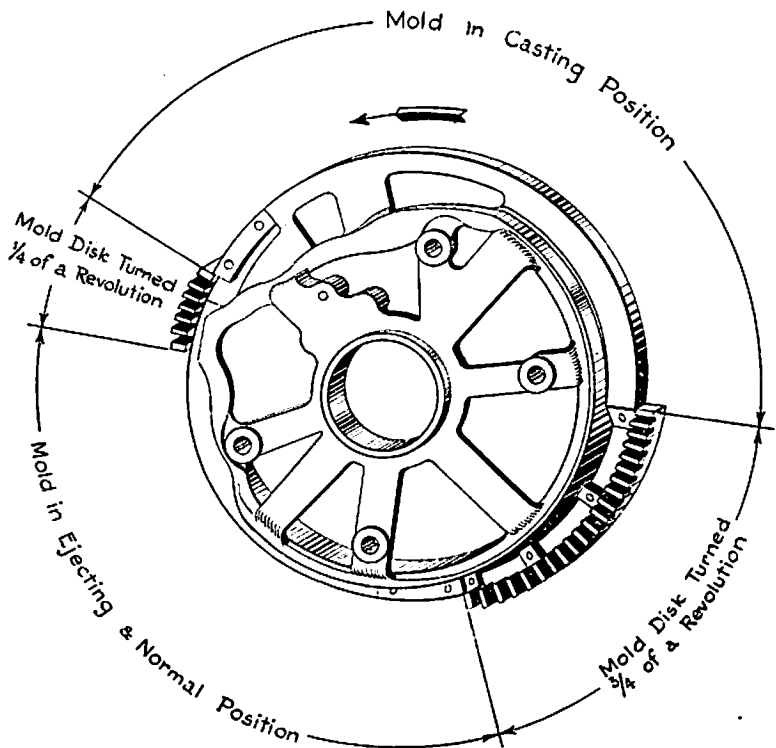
The Vise Closing and Mold Turning Cam, showing the parts of the mold turning cam which promote the rotary movements of the mold disk
